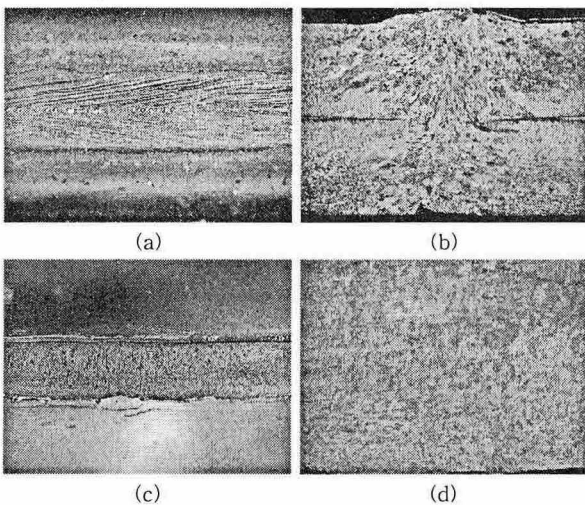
Bead shapes for CO<sub>2</sub> LASER-TIG hybrid welding ; (a) Top surface, (b) Transverse cross-section, (c) Longitudinal cross-section, 40X, (d) Longitudinal cross-section, 100X
